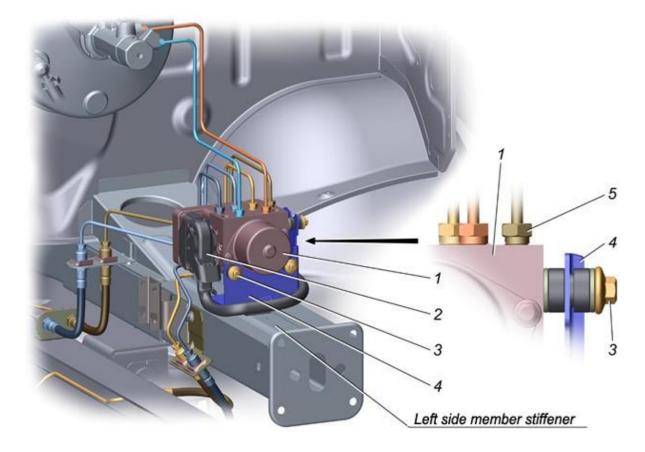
ABS hydraulic control valve installation: 1 - hydraulic control valve; 2 - ABS harness connector terminal block; 3 - nuts securing hydraulic control valve to bracket; 4 - hydraulic control valve bracket; 5 - pipeline nuts;
